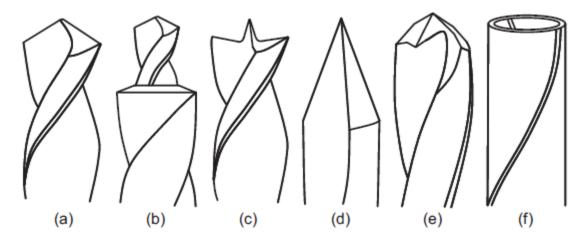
Schematic representation of drill bit geometries: (a) standard twist drill; (b) step drill; (c) candlestick drill; (d) dagger drill; (f) multi-faceted drill; (e) core drill [127].
